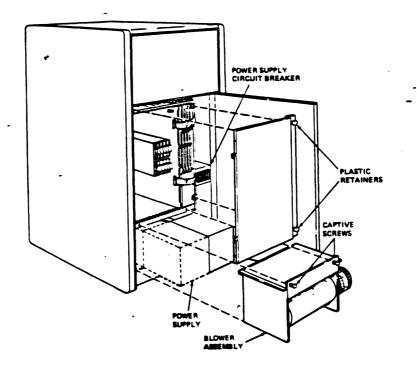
BLOWER ASSEMBLY REMOVAL
